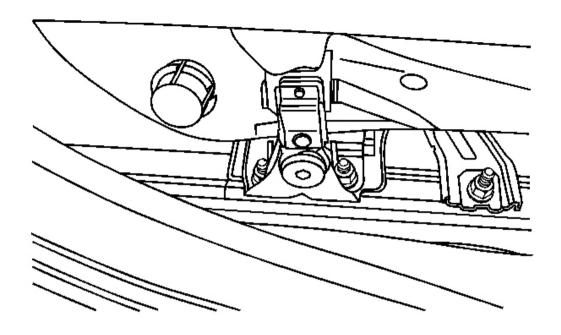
Seat Belt Anchor Courtesy of GENERAL MOTORS CORP.
